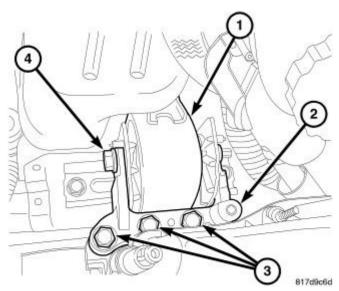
Right Engine Mount Assembly Courtesy of CHRYSLER GROUP, LLC
